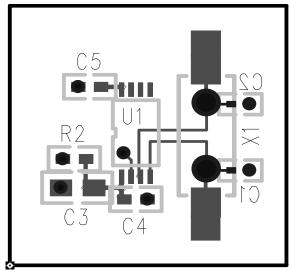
B. ICS843011 PC BOARD LAYOUT EXAMPLE
